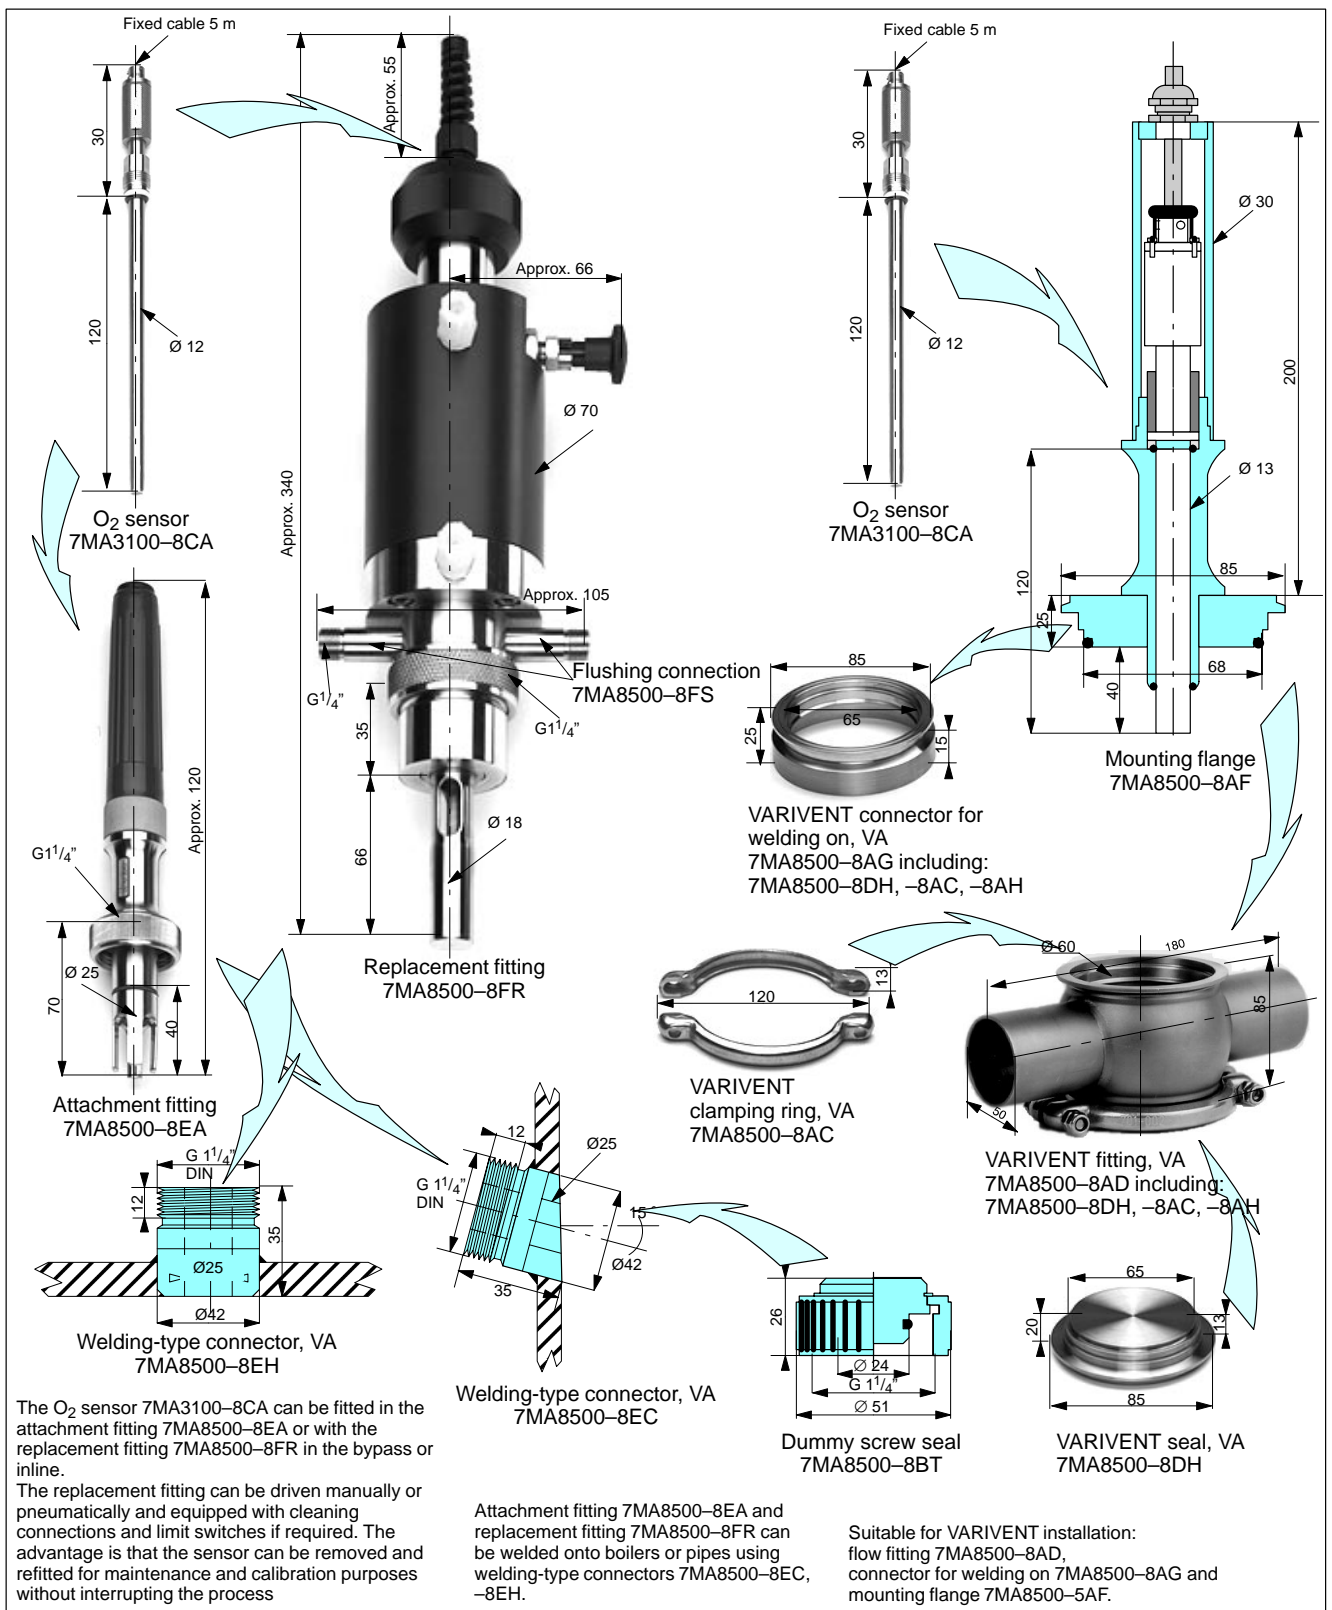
/20 Oxygen sensors, matching fittings and accessories, dimensions in mm
